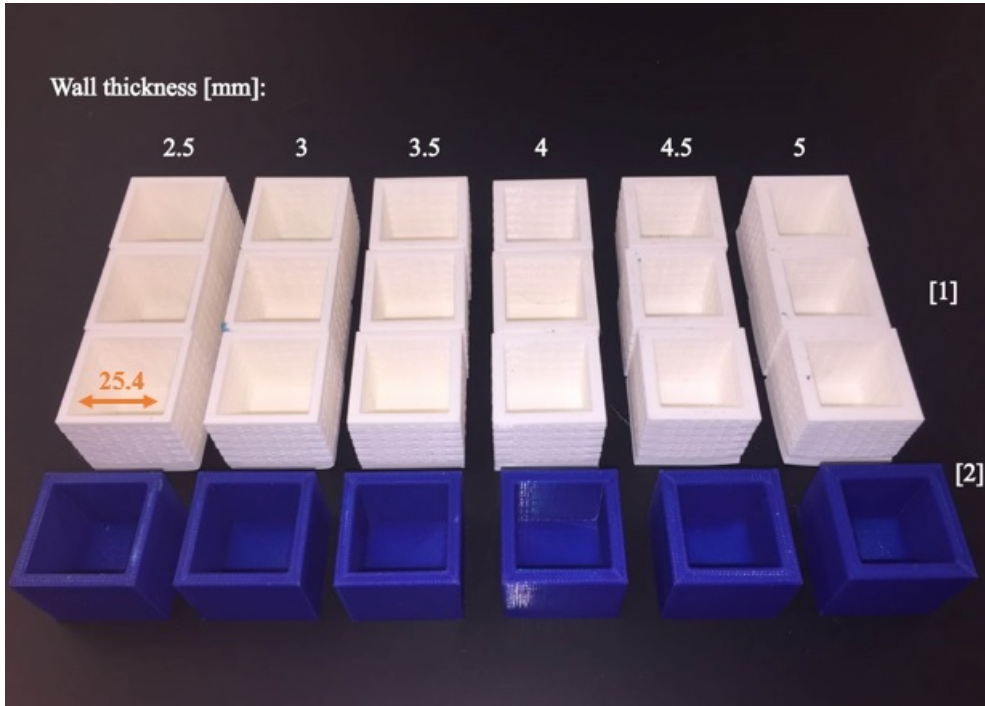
Photo of fabricated testing samples. [1]. ODEC samples, [2]. Control samples.
